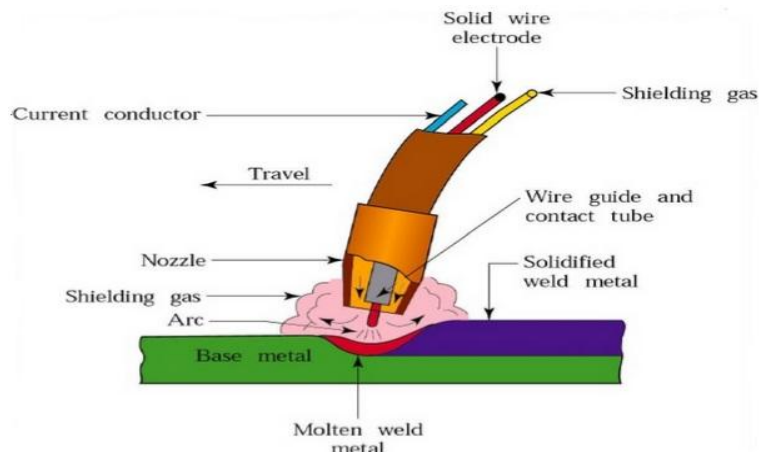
Schematic Illustration of the Gas Metal Arc Welding Process
